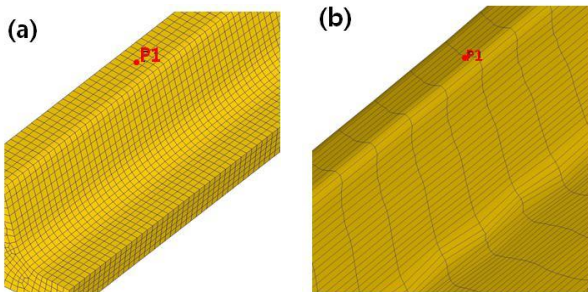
Point tracking locations at flange at (a) initial blank (b) final H-beam
